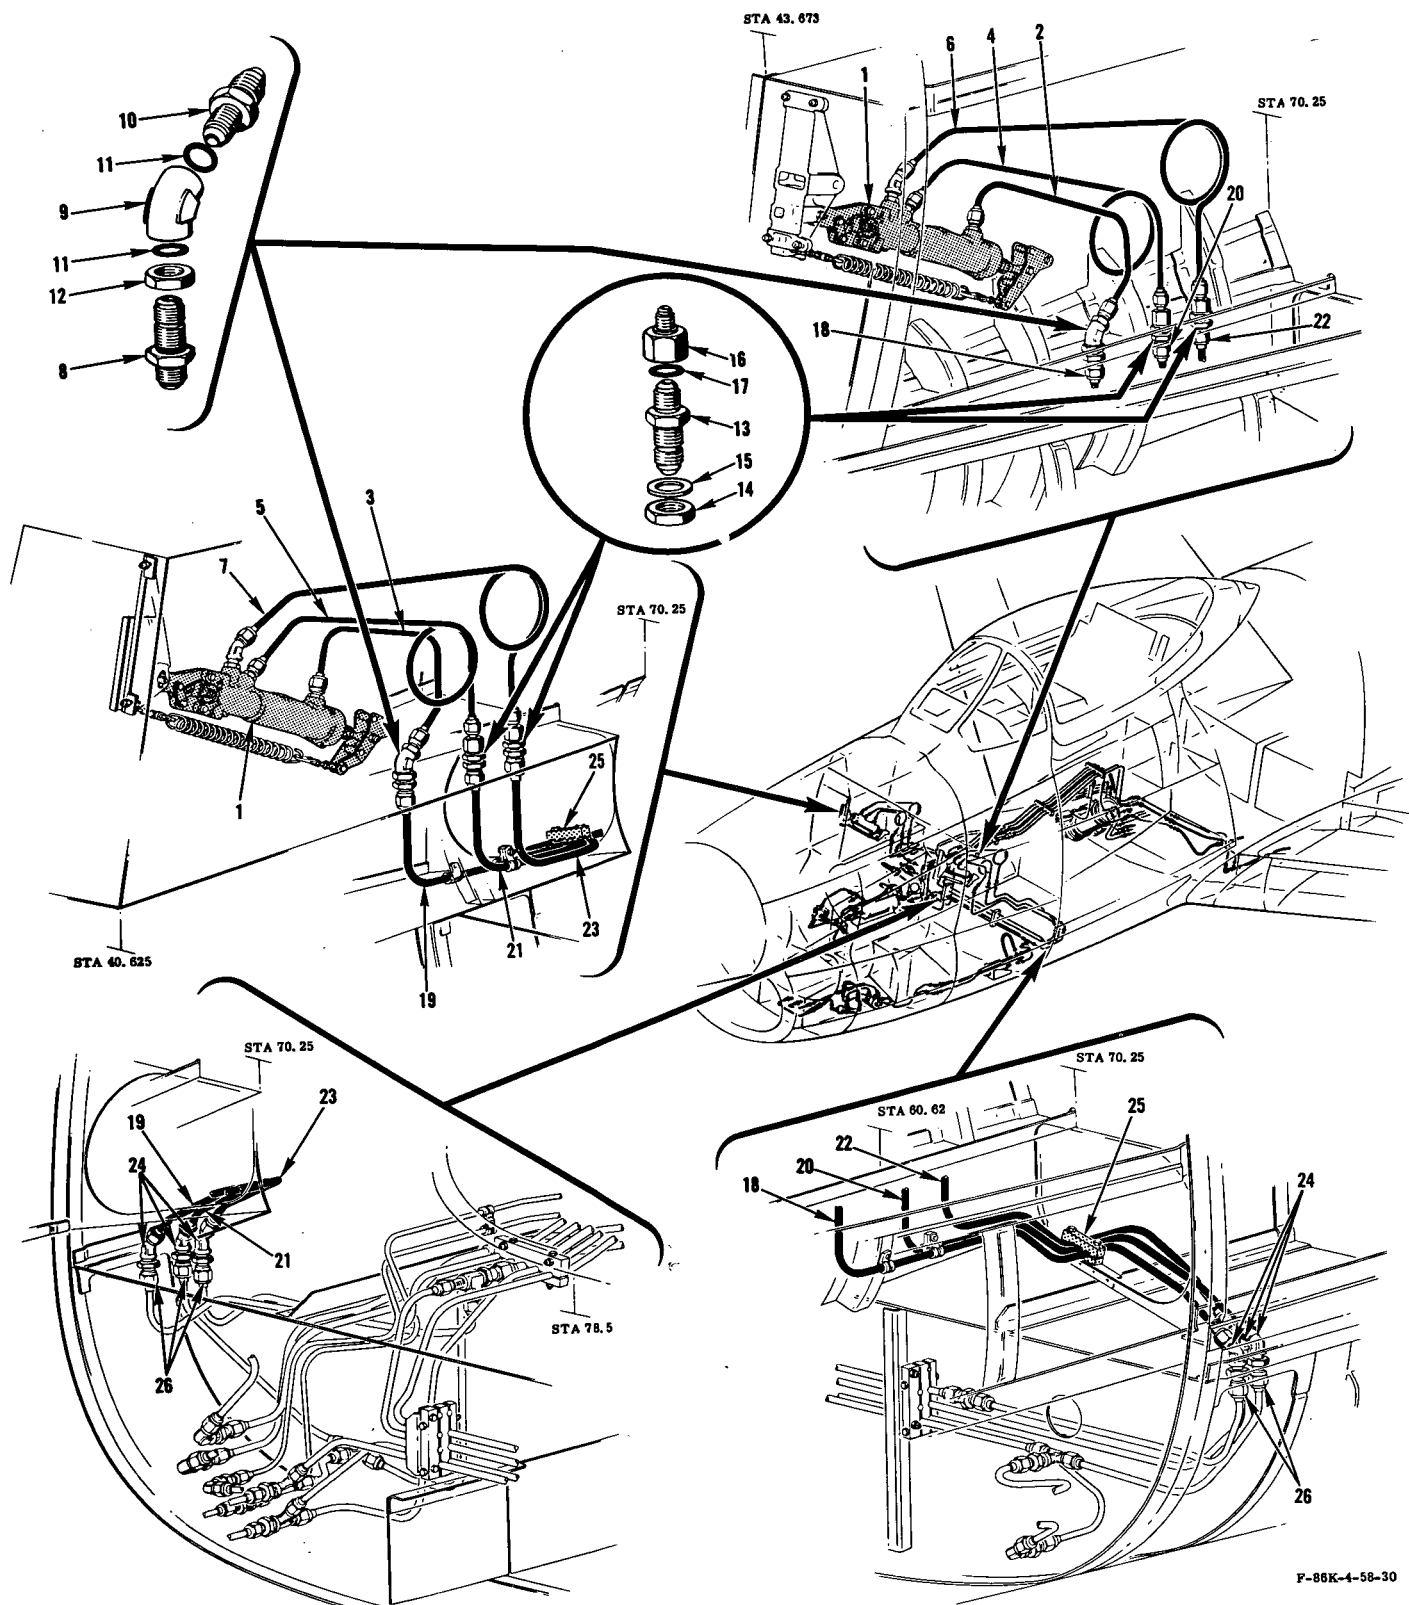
FUSELAGE STATION 12.75 TO 70.25 UPPER LH AND RH HYDRAULIC EQUIPMENT
